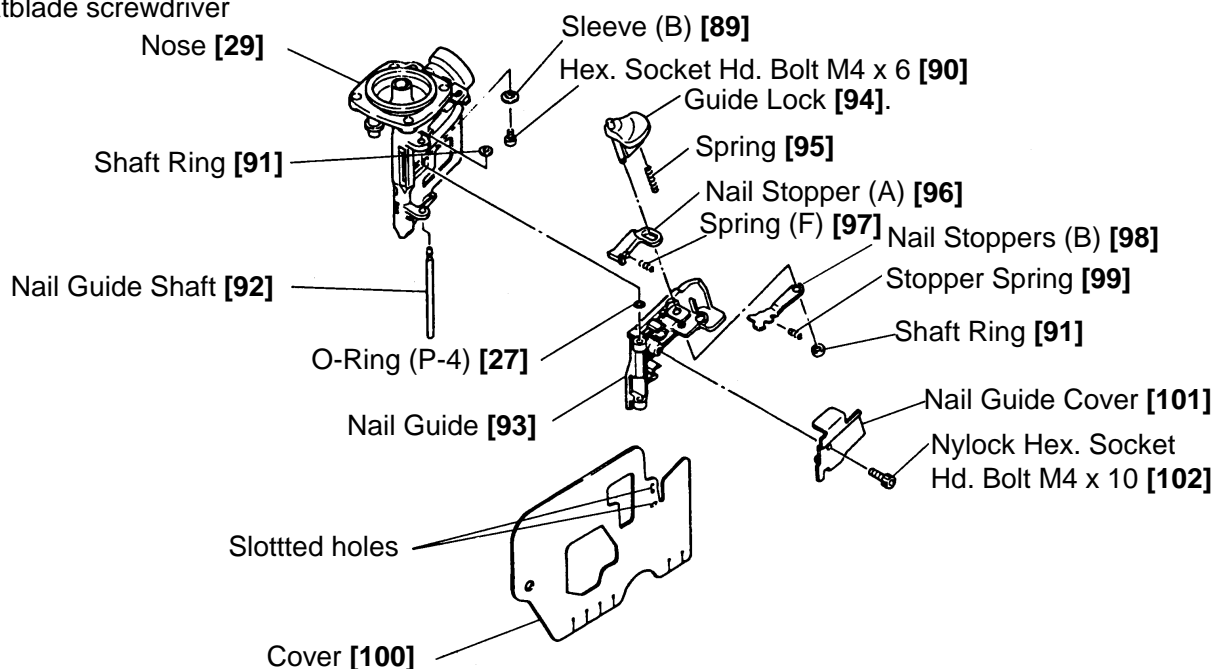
Disassembly and reassembly of the nail guide, nail stoppers (A) and (B), etc.
